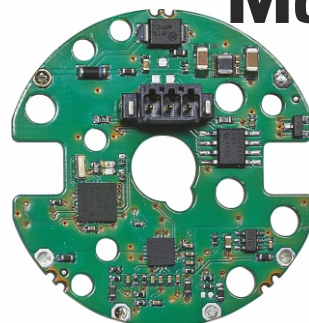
1, B-Head mounting | Abb. 1:1, B-Kopfmontage
